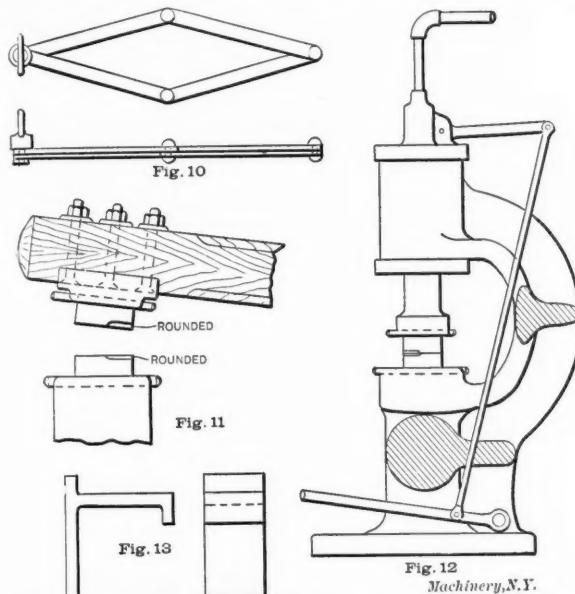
Gage for Setting Adjustable Die to any angle. Fig. 11. Common, but Objectionable, Way of Placing Dies in Helve Hammer. Fig. 12. General Appearance of Pneumatic Hammer for Light Forging. Fig. 13. Piece that can be forged to Advantage in the Forging Machine.
